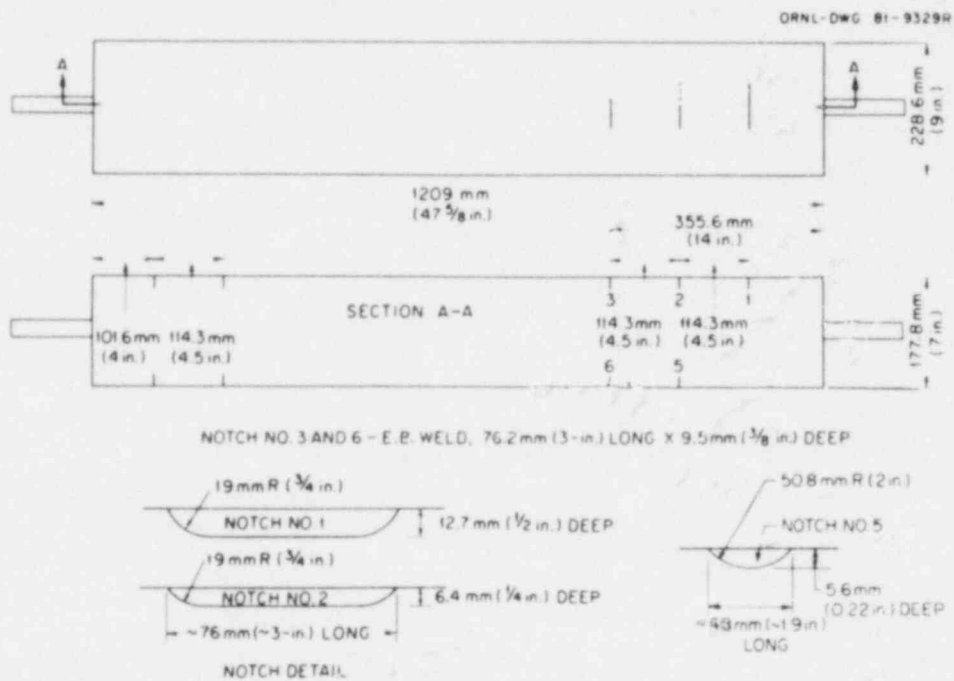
Specimen block containing the electrodischarge-machined notches and EB weld cracks (block 4).
